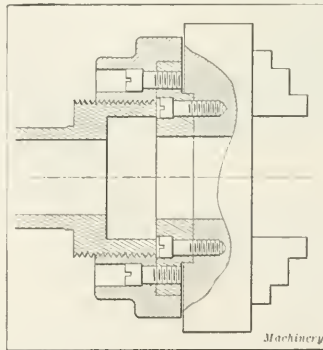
Small Chuck fitted to Lathe Spindle with Special Adapter
